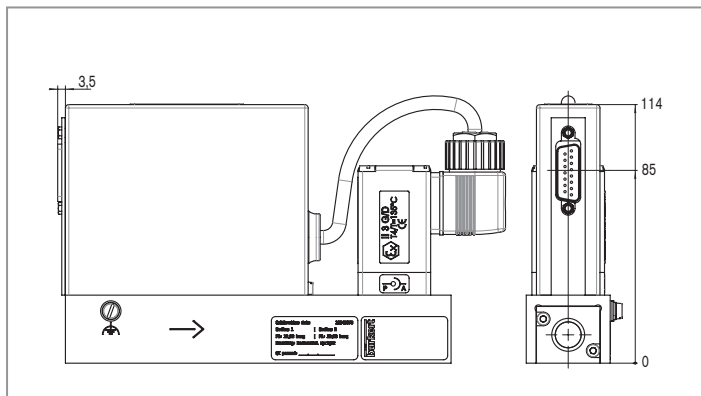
Dimensions of MFC with metal housing and external solenoid valve, type 8711
